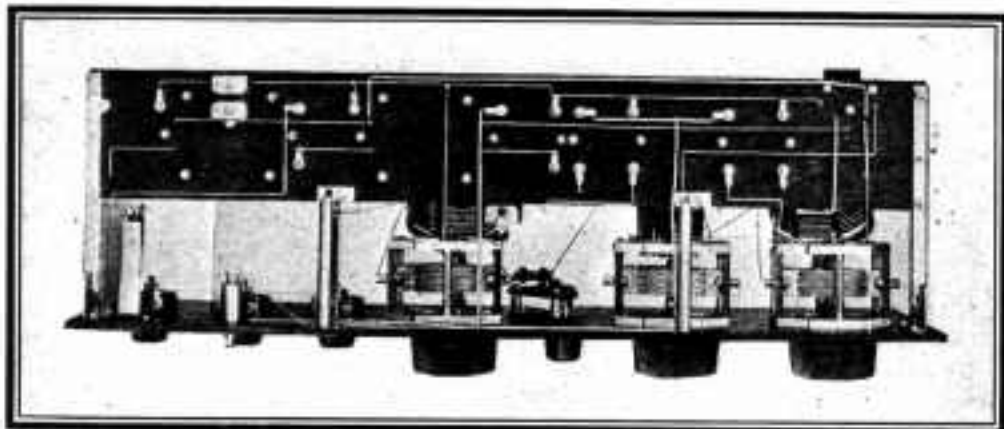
This view will help you in checking against the step-by-step instructions and the picture wiring diagram
